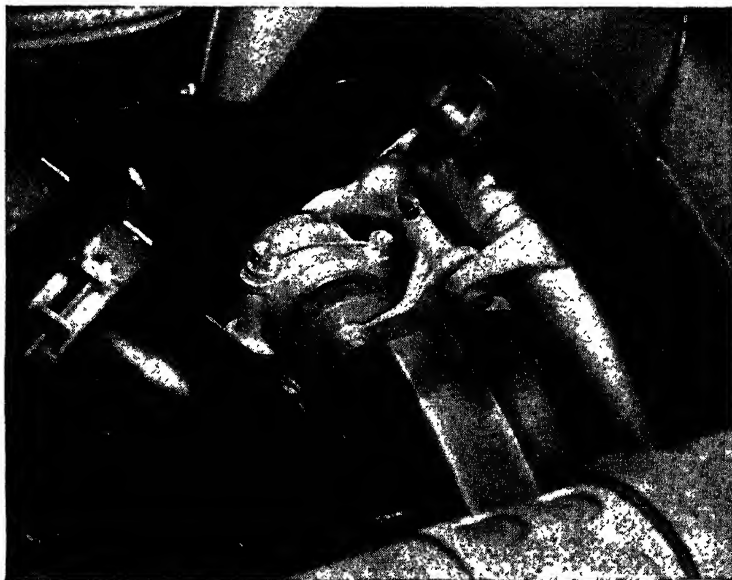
Detail view of the hinge and tubular rubber-bushing arrangement used in a mount similar to that in Fig. 172. (*Lord Manufacturing Co.*)
